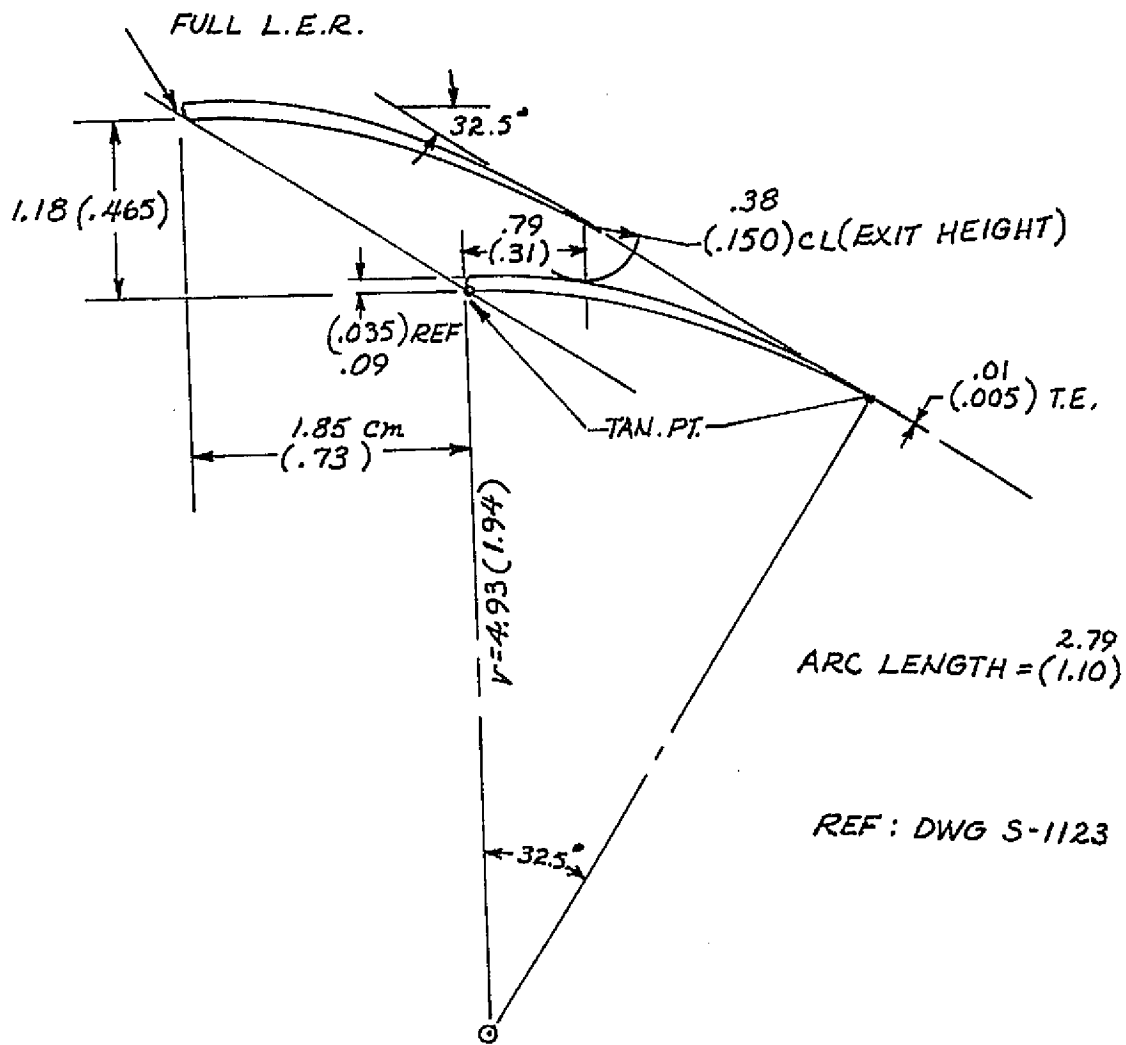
SKETCH SHOWING FLAP CONFIGURATIONS SIDE VIEW
